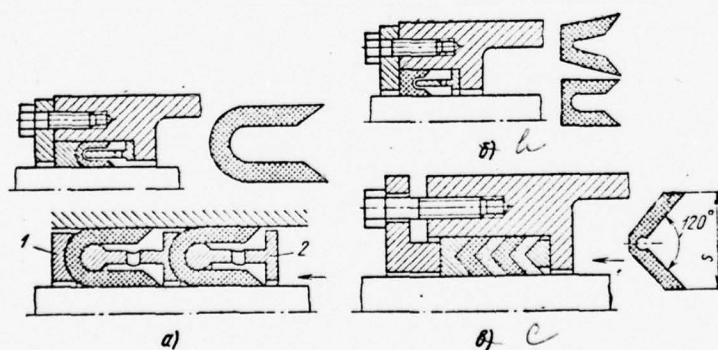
Standard forms of sleeves. Furthermore, the groove must be so that of the ring, inserted in cylinder, in lock would be
